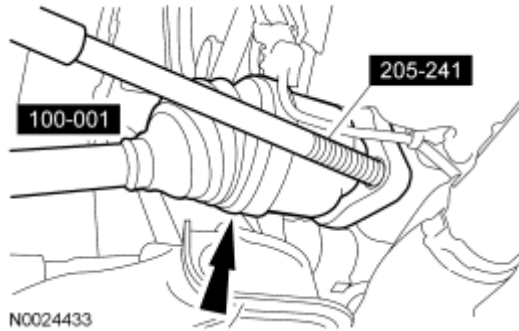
Removing RH Outer Halfshaft Using Special Tools
